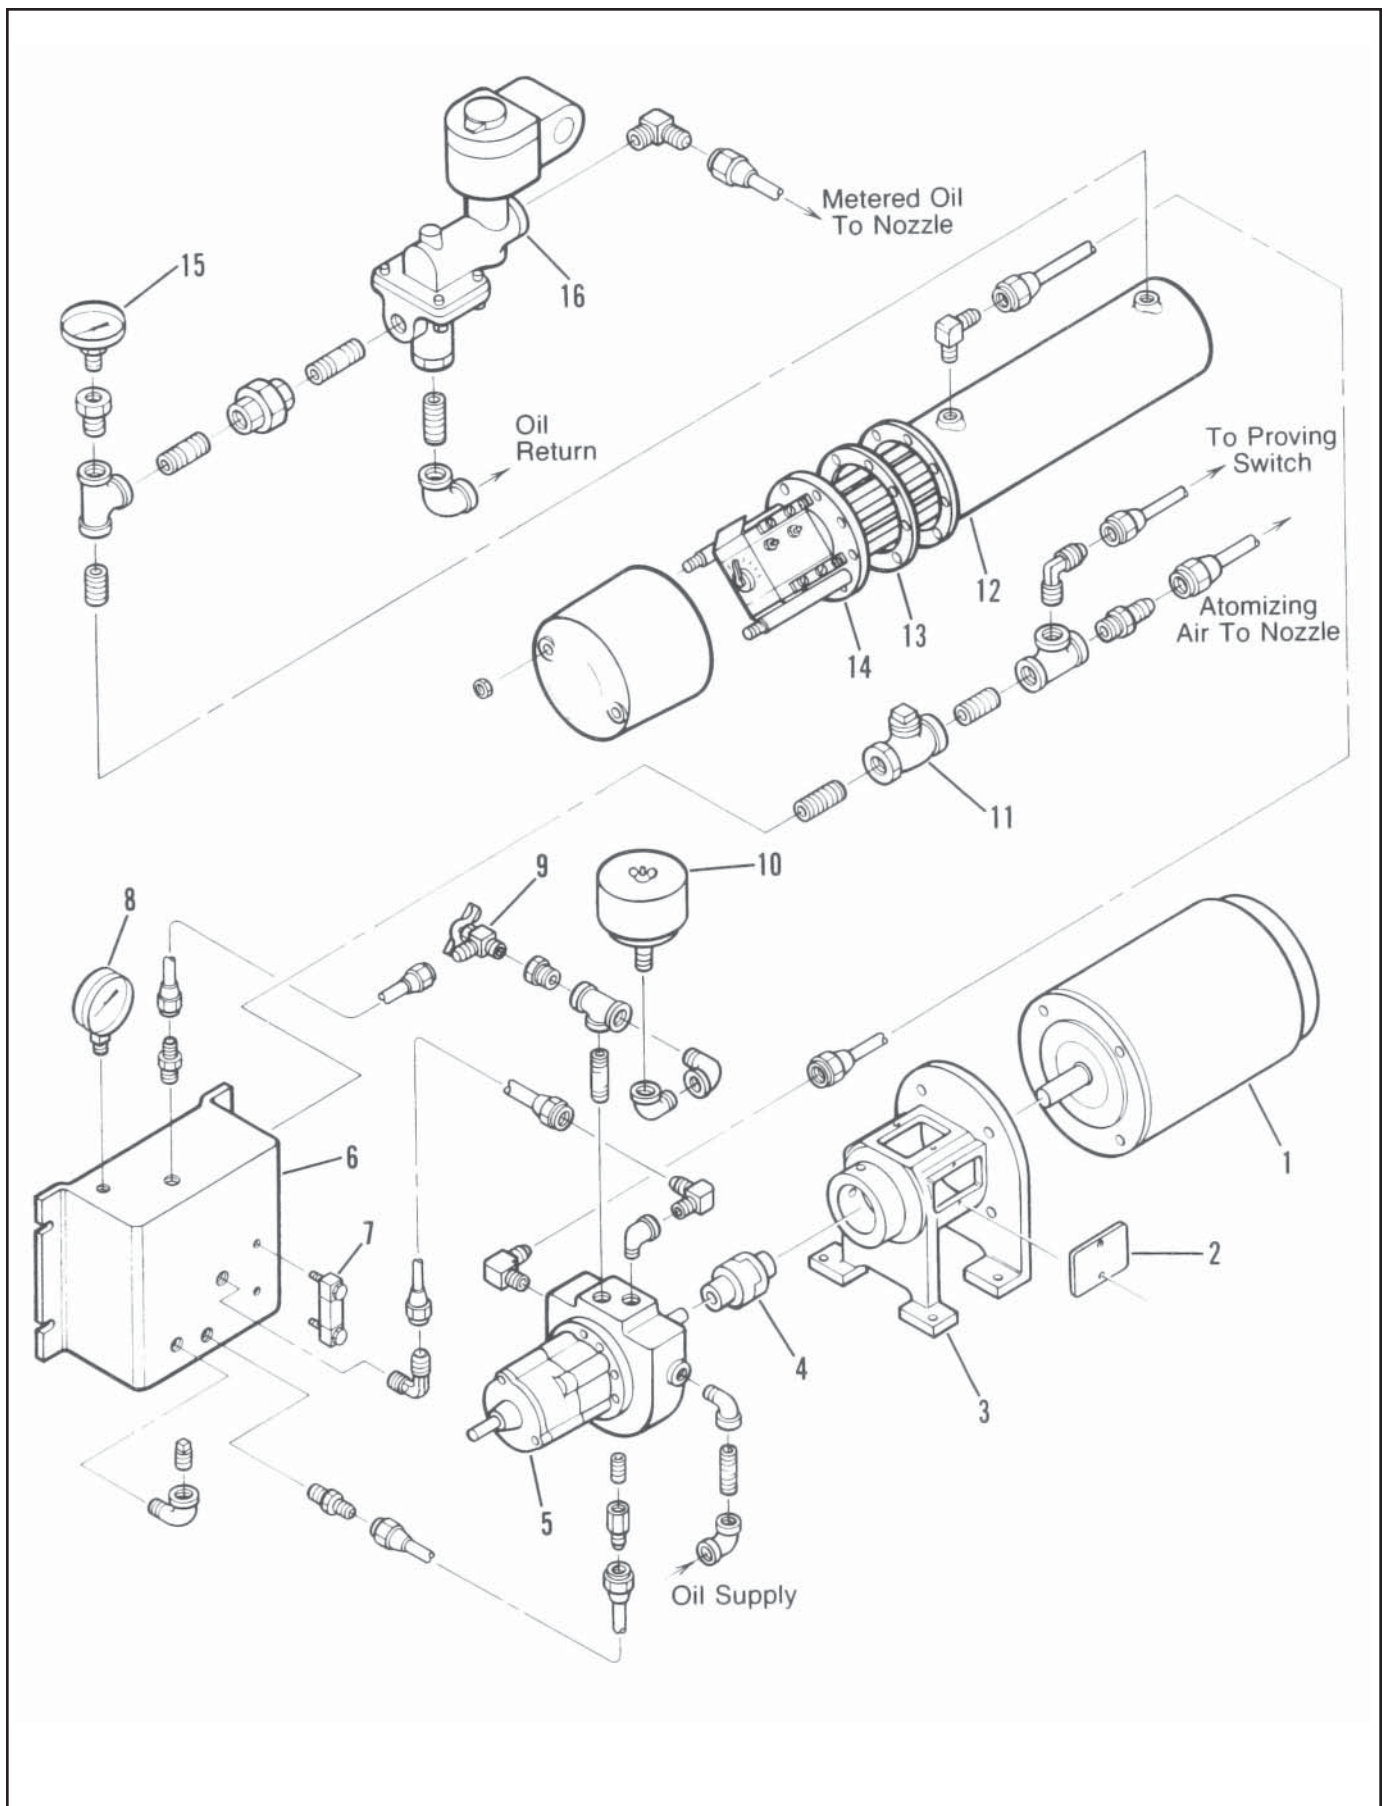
AIR ATOMIZING OIL METERING ASSEMBLY MM, ME
